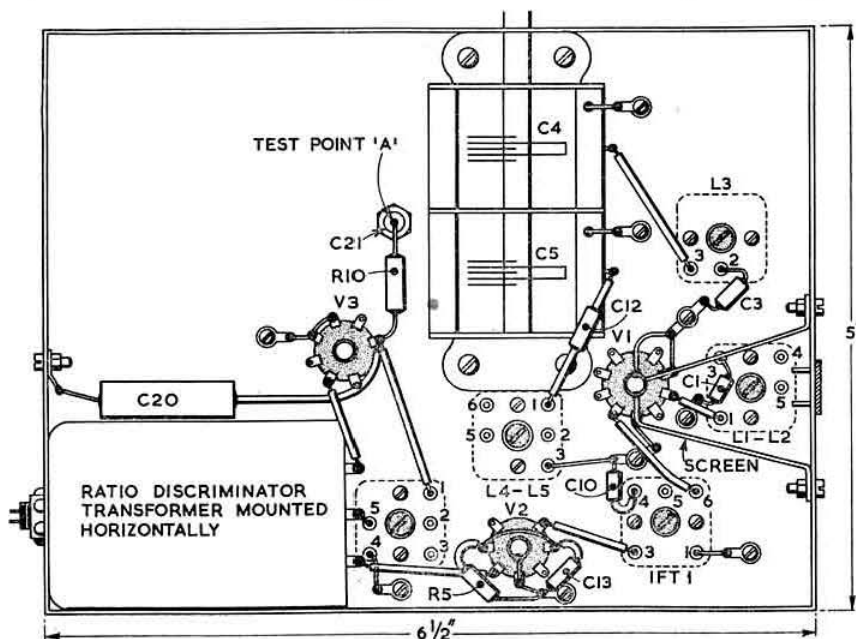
Under-chassis layout of the principal components in the f.m. tuner.
